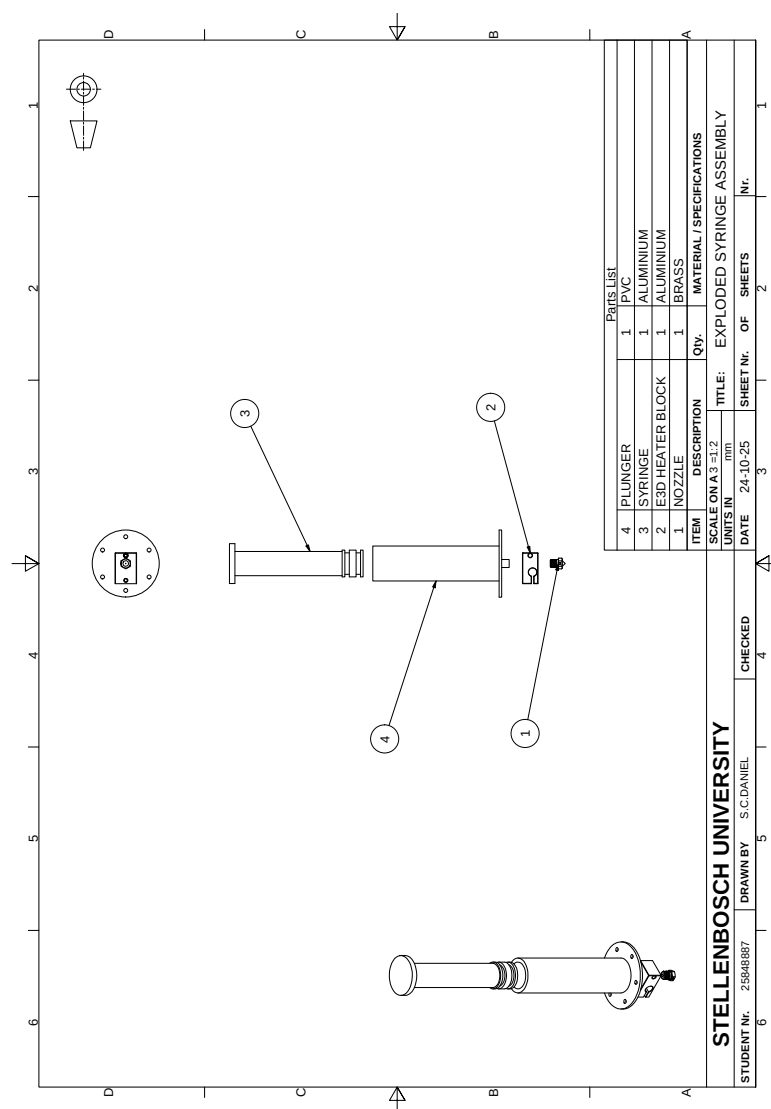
Mechanical drawing of the exploded syringe assembly.
